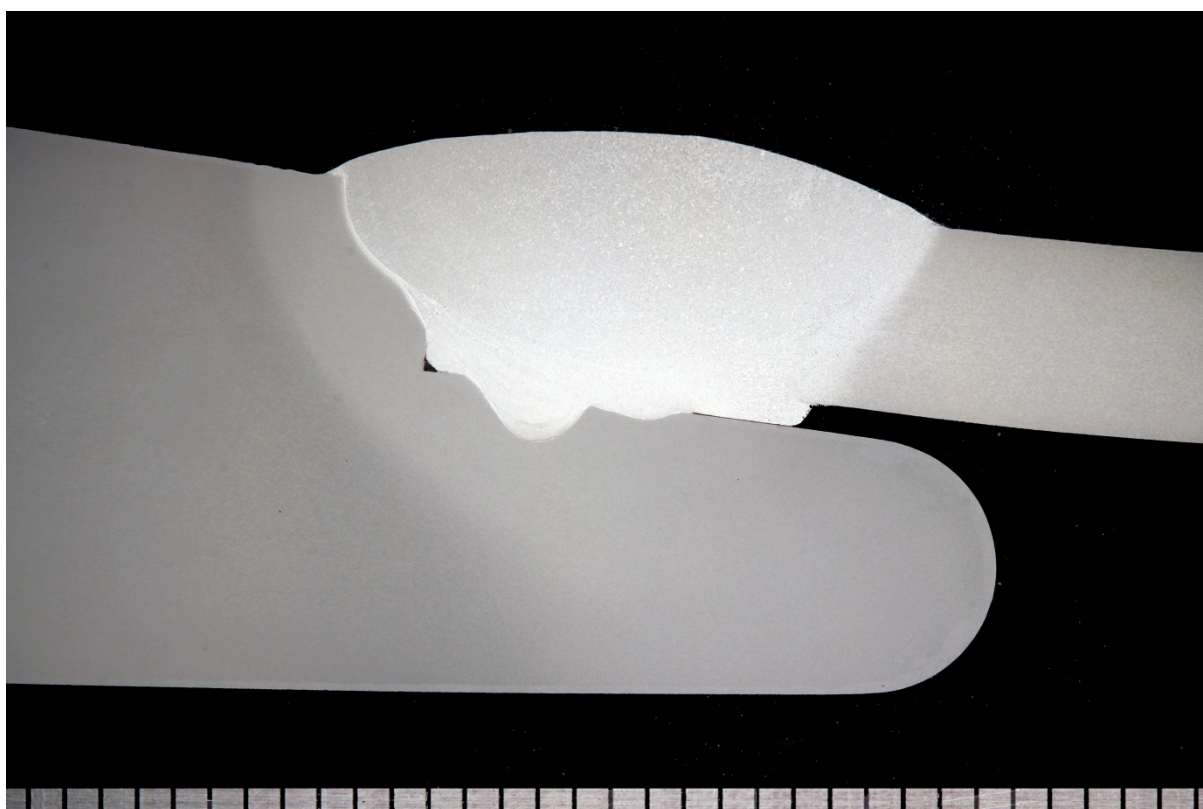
Rupture of the parent metal (end dish) at the toe of the fillet weld joining the end dish to the extrusion band. Rupture located at the right end of the buckled portion of the bulkhead as shown in Figure I1.
